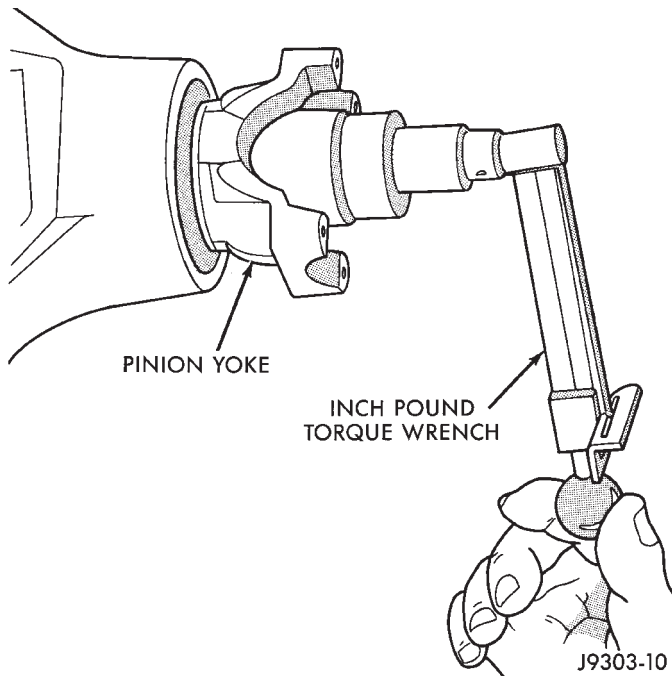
Check Pinion Gear Rotation Torque—Typical
